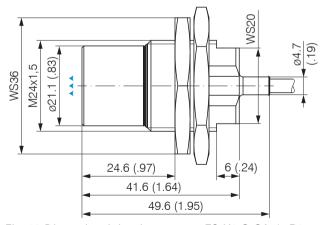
Dimensional drawing sensors ES-U8-C-CAx/mB0
